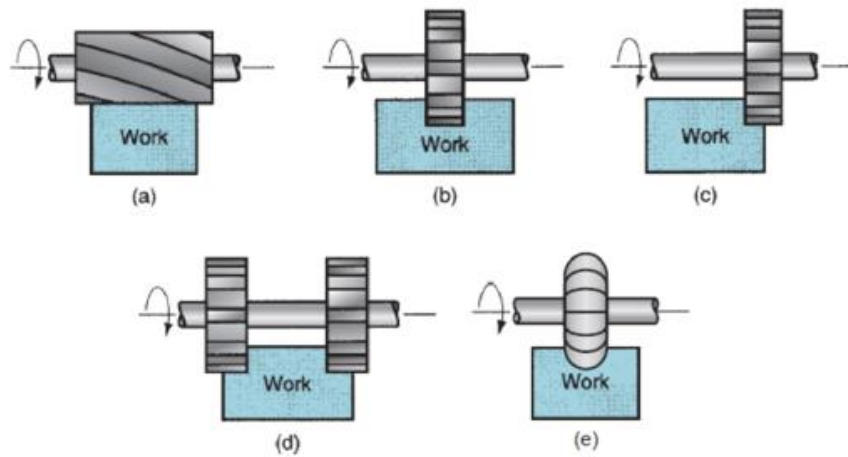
Types of edge trimming - a) Slab milling, b) Slotting, c) Side milling, d) Straddle milling, e) Form cutting [50]
